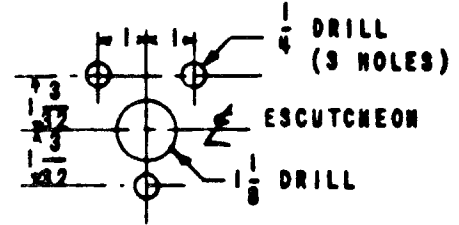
Panel Drilling Dimensions Diagram for Test Switch Used with PVD Test Equipment
